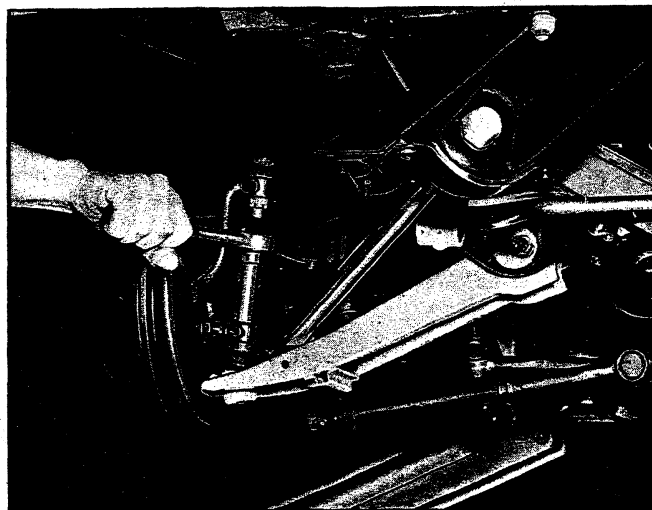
Disassembling Lower Ball Stud - Chevy II
